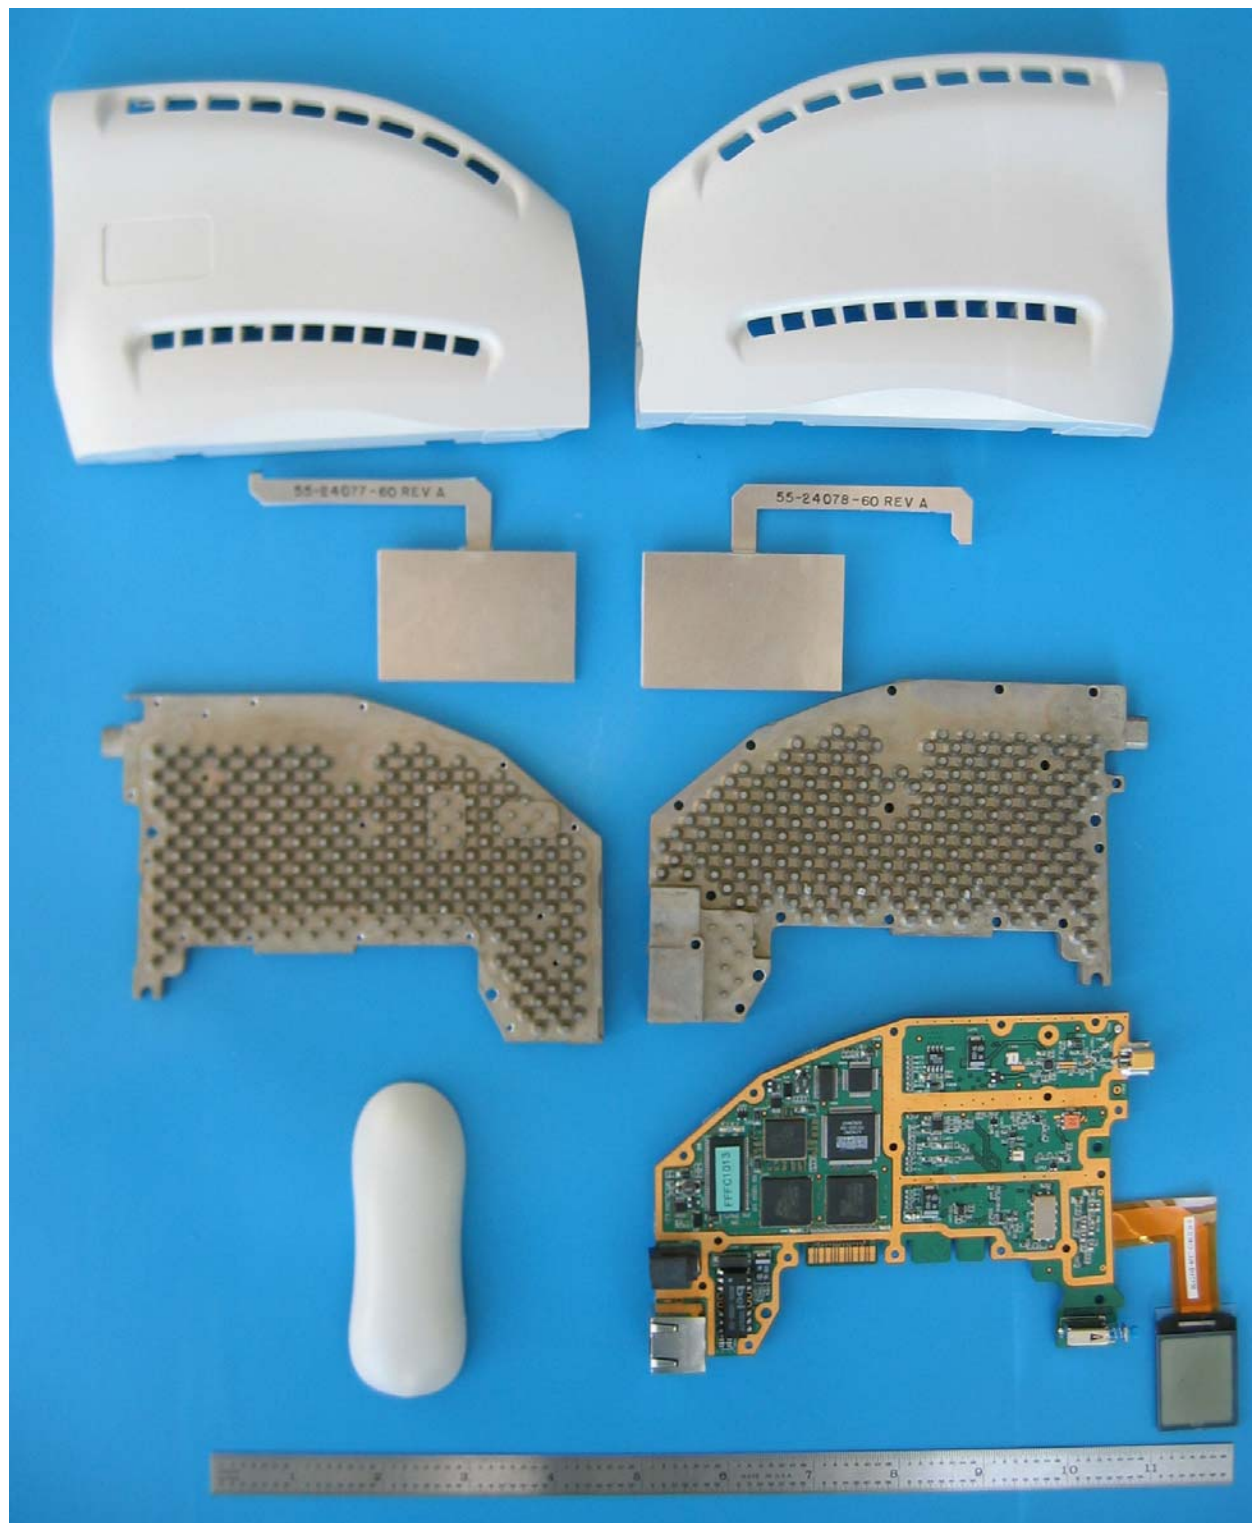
Internal board, Shield, Patch & Upright Antenna, & Casing Front View
